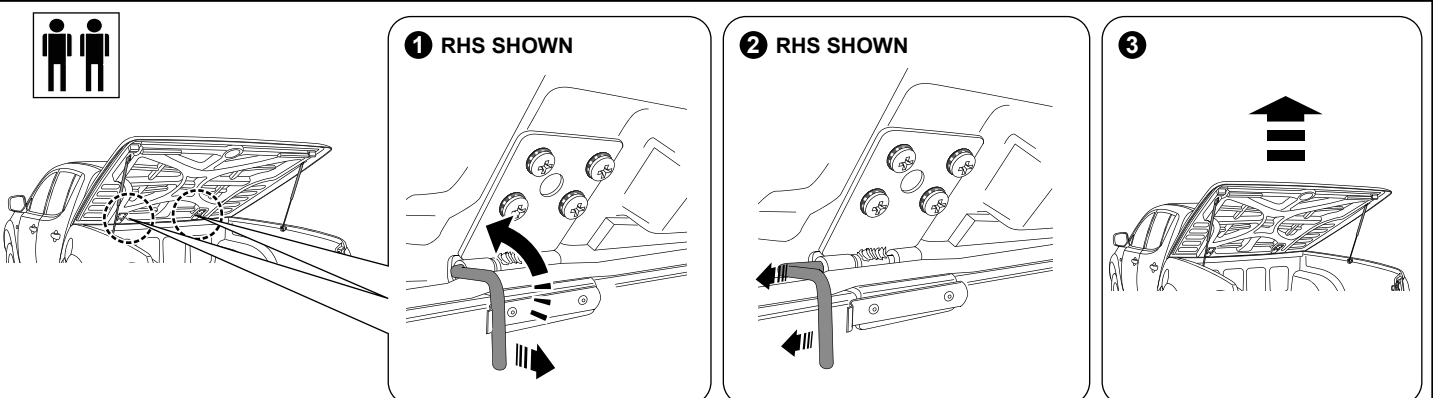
Remove hinge pins and remove the tonneau cover as shown.
